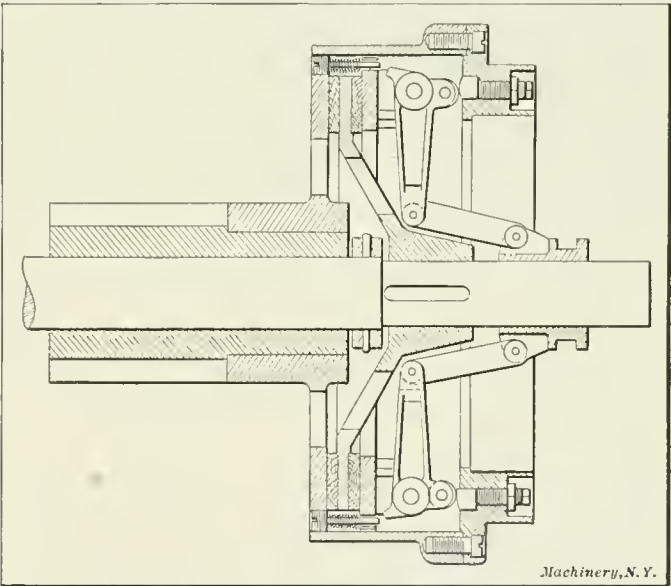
Friction-clutch used on Wiring and Drawing Presses
